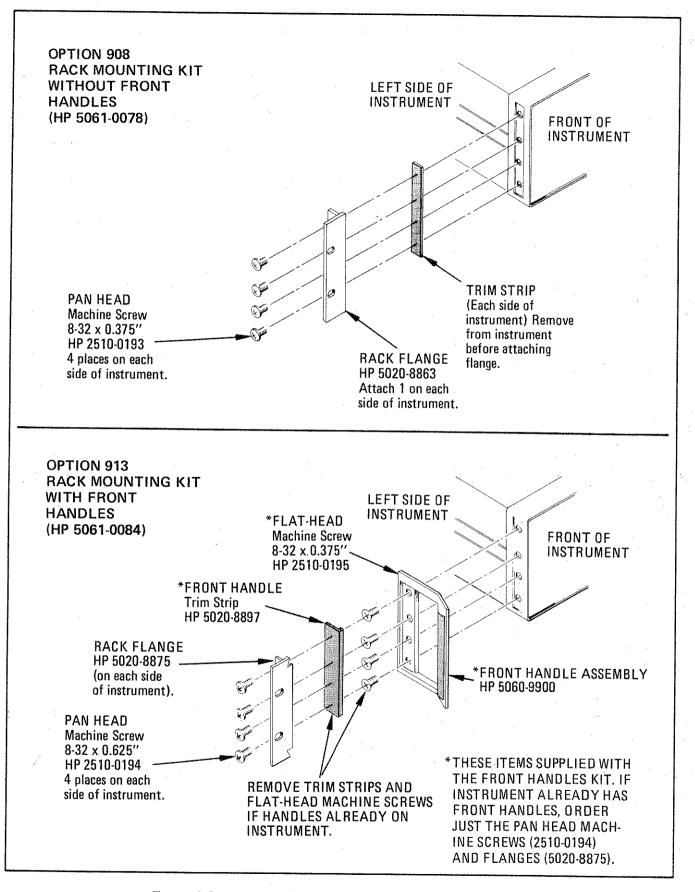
Attaching Rack Mounting Hardware and Handles
